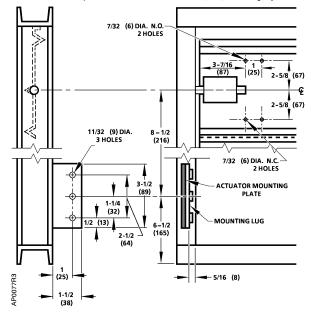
Frame Mounting Dimensions. Dimensions in Inches (Millimeters).
